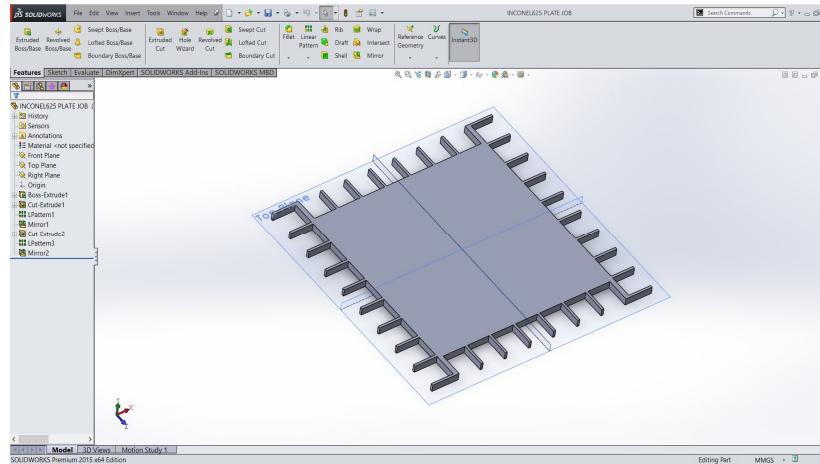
Part modelling of Inconel 625 plate in solid works.
